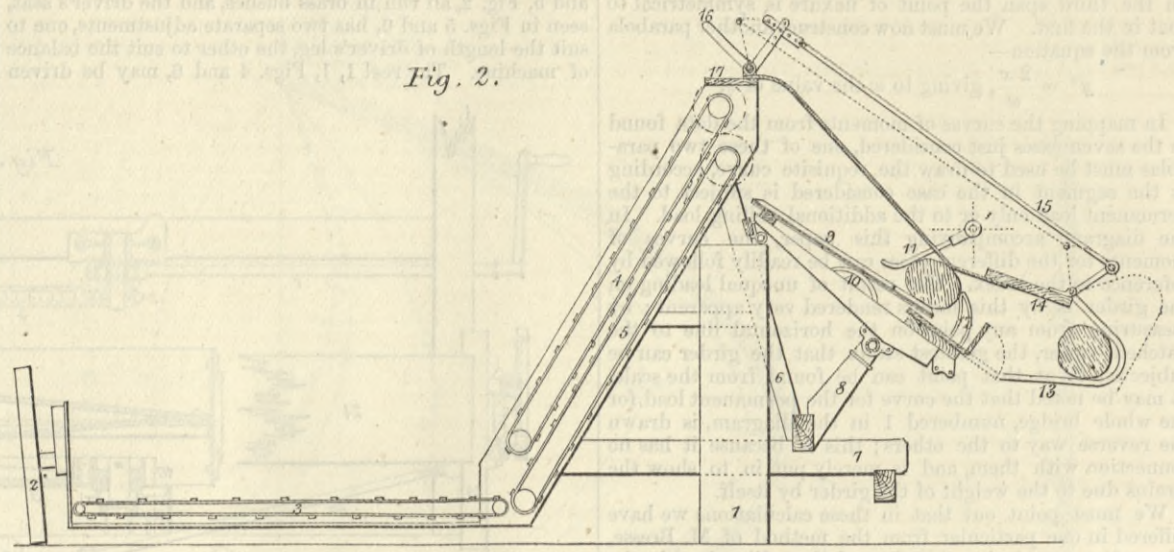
1. Main wheel. 2. Divider wheel. 3. Platform apron. 4. Elevator apron. 5. Ditto ditto. 6. Elevator post. 7. Gear frame. 8. Binder post. 9. Trip board, forming part of binder platform. 10. Trip lever. 11. Ejector. 12. Compressor jaws. 13. Sheaf cradle. 14. Sheaf delivery board. 15. Rod working sheaf cradle. 16. Lever working sheaf cradle. 17. Top board.
